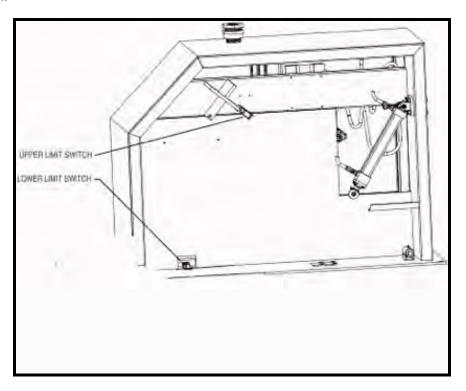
View of Upper and Lower Limit Switches, Control Cabinet
